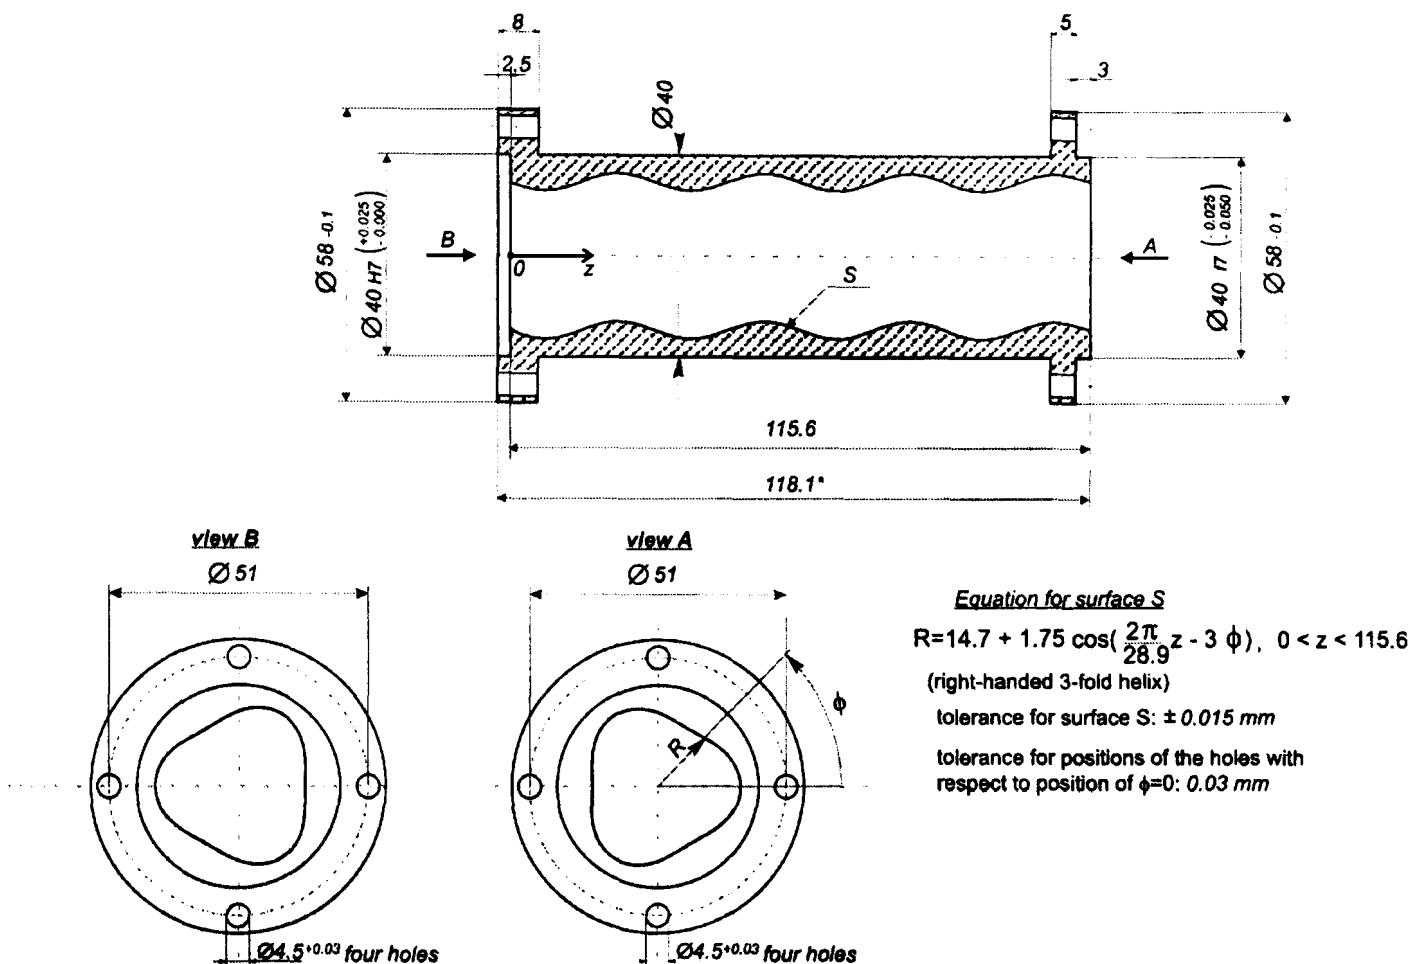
Technical drawing of the aluminium helically corrugated waveguide.
